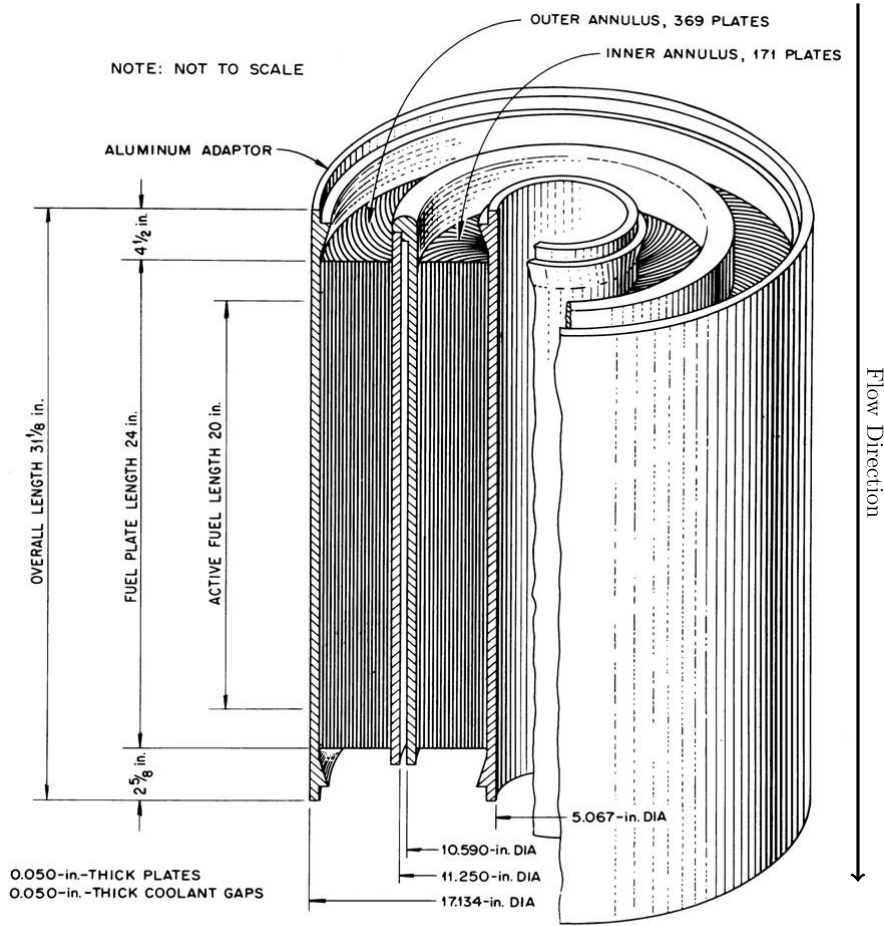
Cutaway view of the HFIR fuel assembly.
